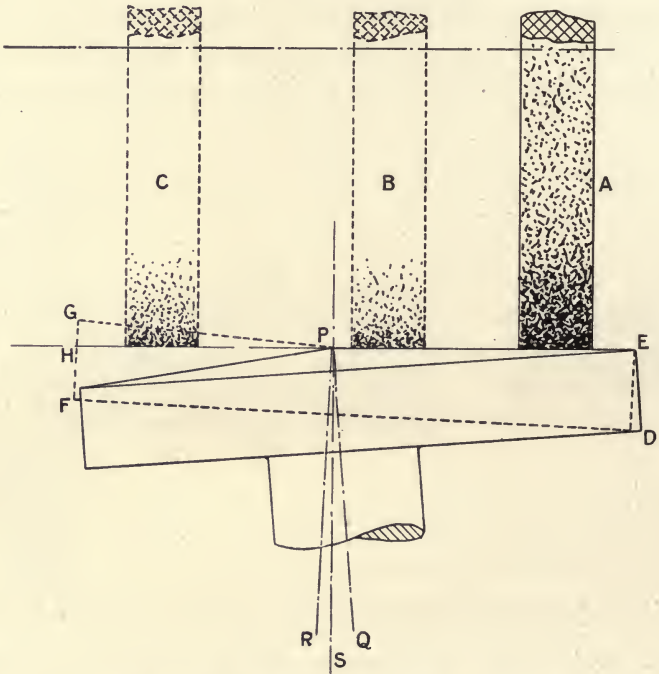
FACE WORK IN UNIVERSAL GRINDER
